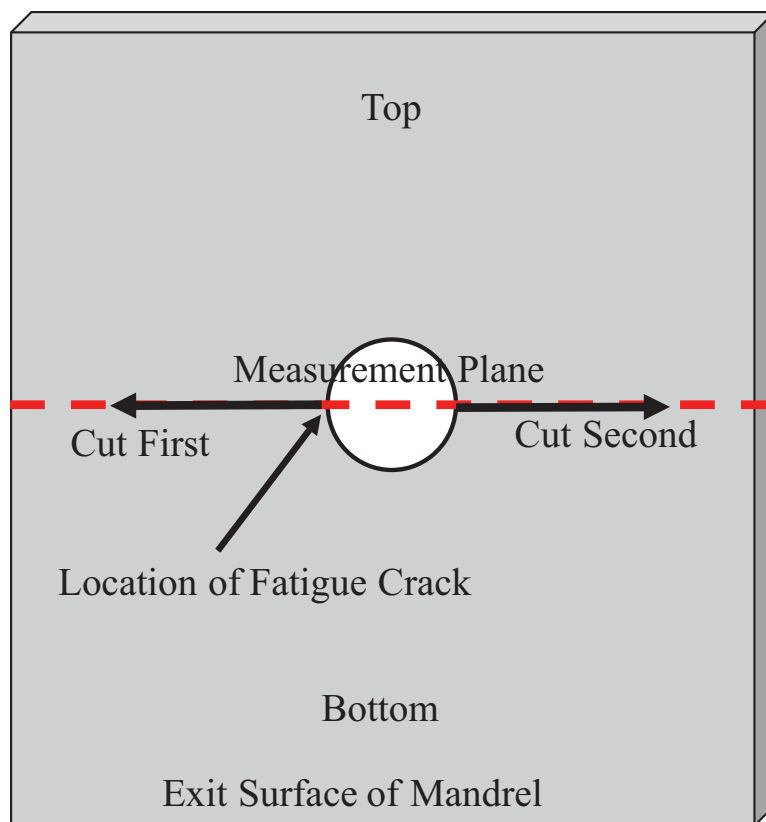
Basic Schematic for Wire EDM Cutting Process for Cx4N1 Fatigue-Cracked Coupons.
